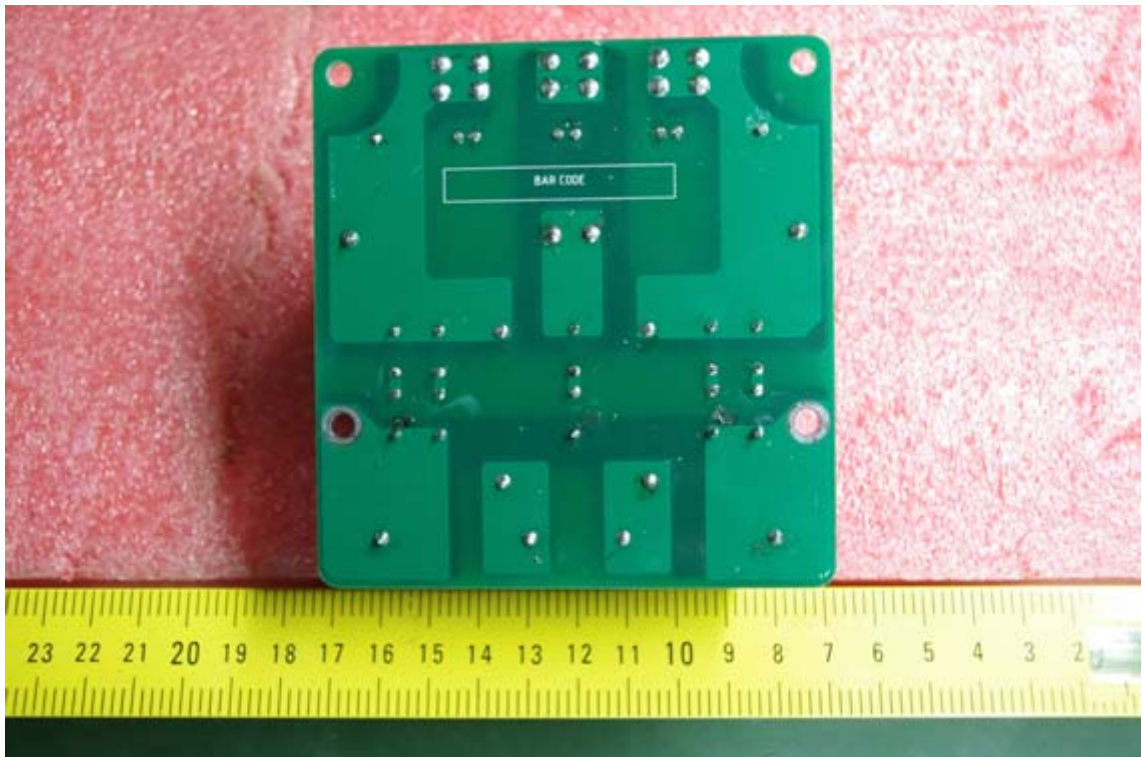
Board SNT\_3320\_PCB\_FR, traces side view
